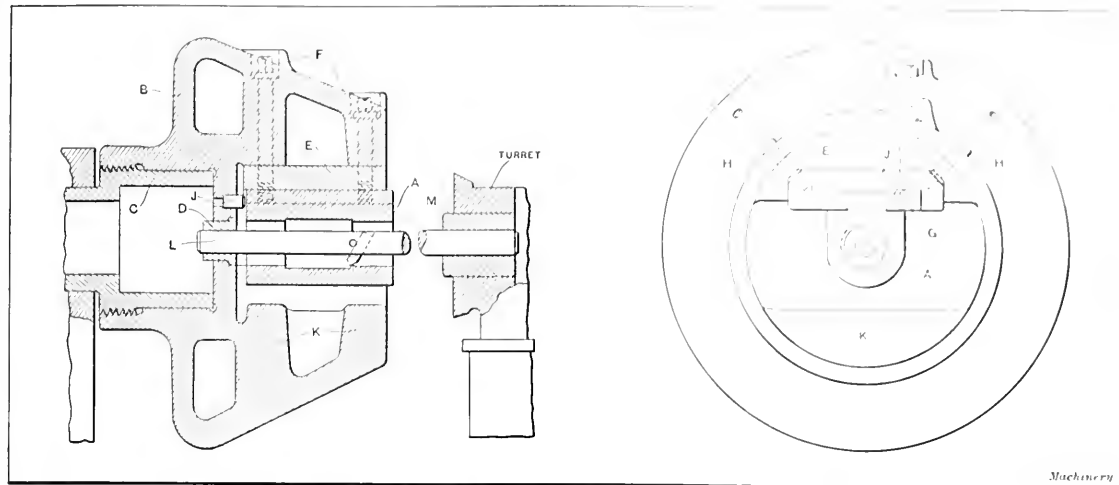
Fixture for boring Small Bronze Castings on Horizontal Turret Lathe
